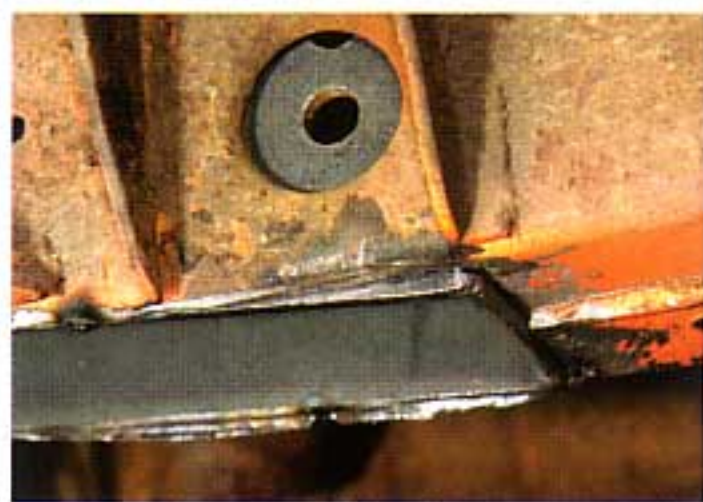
& 13b: Using a cut-off wheel or plasma cutter, cut the bottom of the frame where the spring pocket will be welded in. Make sure to leave plenty of frame in place for grinding to make a precise fit.
